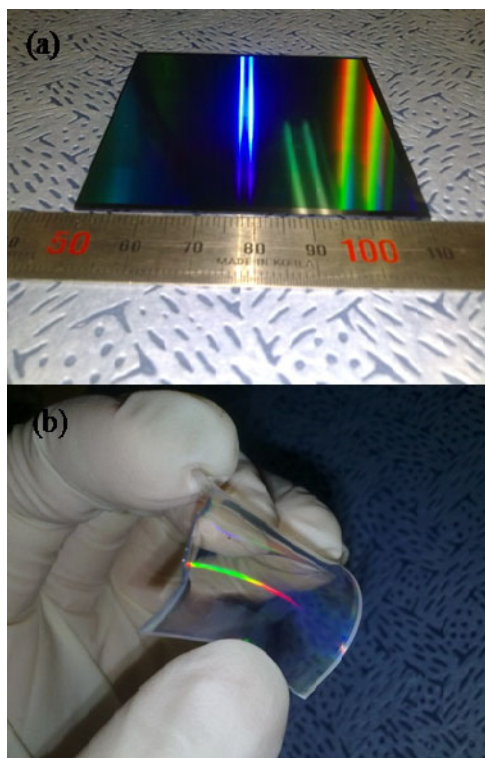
Photographs of (a) Si stamp and (b) PDMS mold
